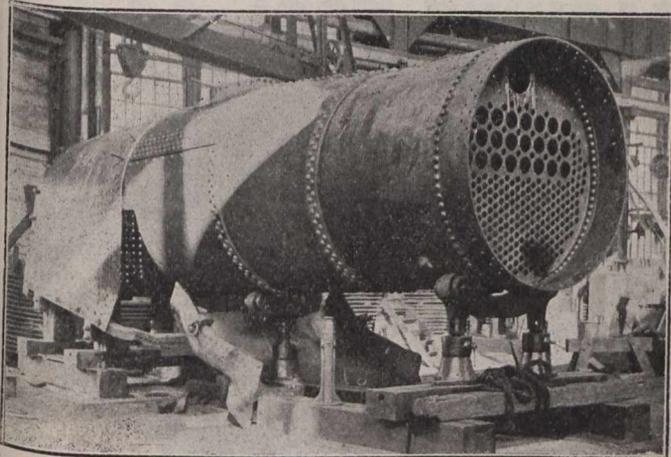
Assembling Stand for Accurately Locating the Boiler Units.
